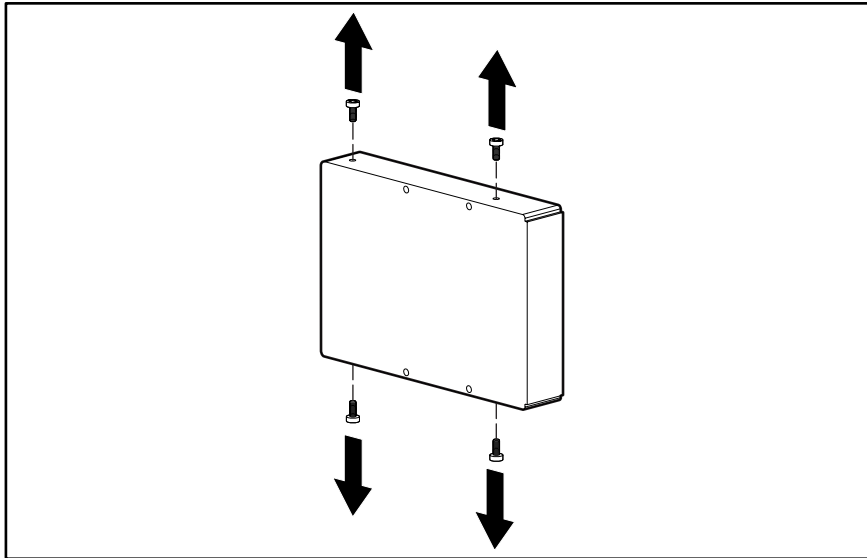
Removing guide screws from the non-hot-plug hard drive
